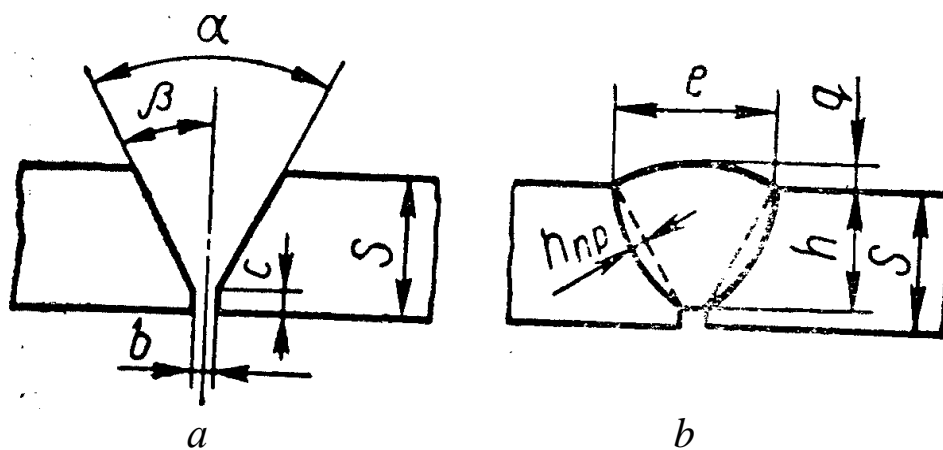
Elements of the geometric shape of prepared edges for welding (*a*) and the performed seam (*b*)
